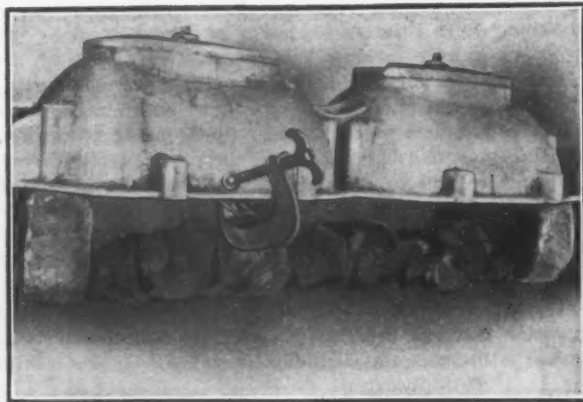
A Badly Broken Case Prepared for Welding.
